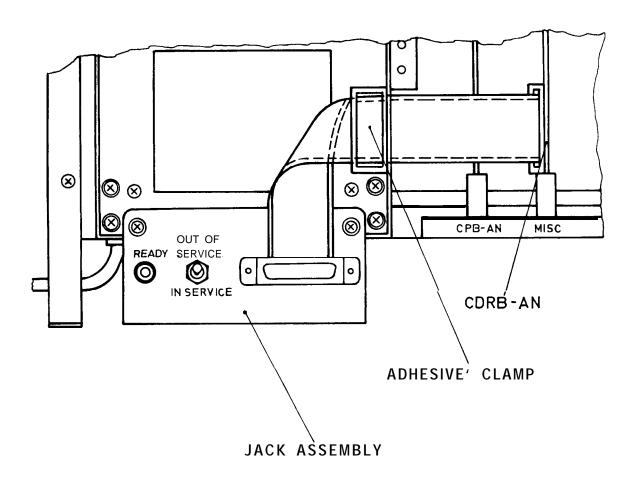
MOUNTING OF JACK ASSEMBLY
